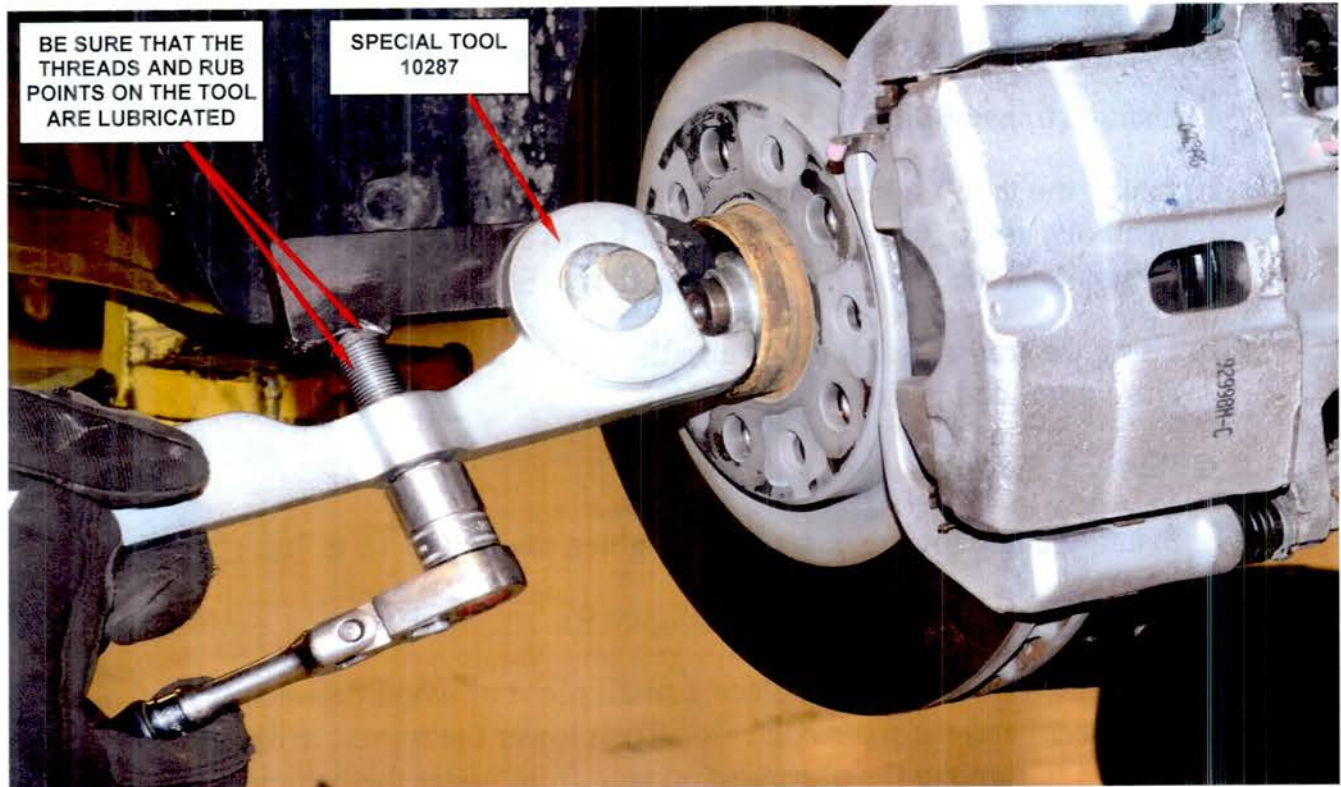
Crimp Halfshaft Nut with Special Tool 10287
